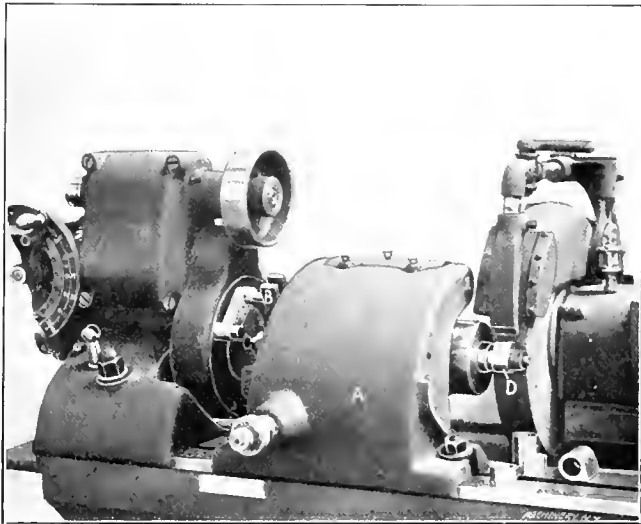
Self-contained Attachment for Grinding Detachable Automobile Cams
